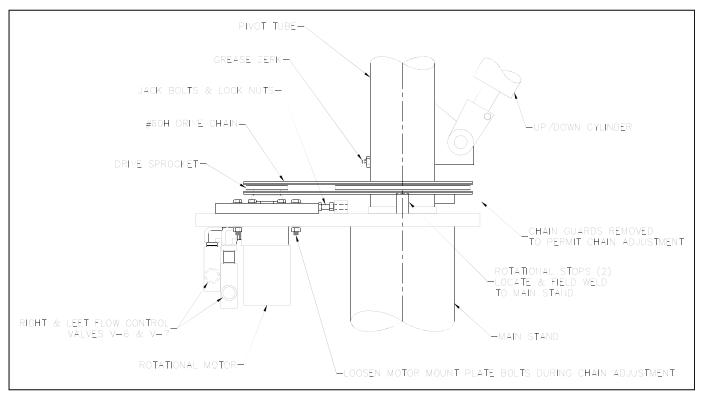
, ROTATIONAL MOTOR & DRIVE CHAIN
